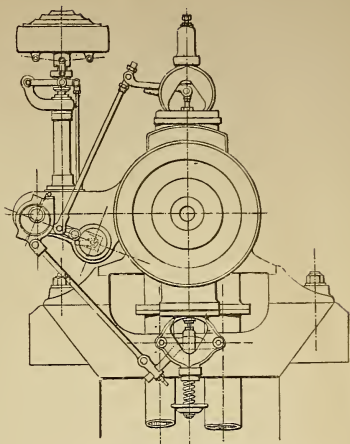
HIGH-PRESSURE CYLINDER OF TANDEM-COMPOUND DROP-VALVE ENGINE, BUILT BY MESSRS. RUSTON, PROCTOR & CO., LTD.
